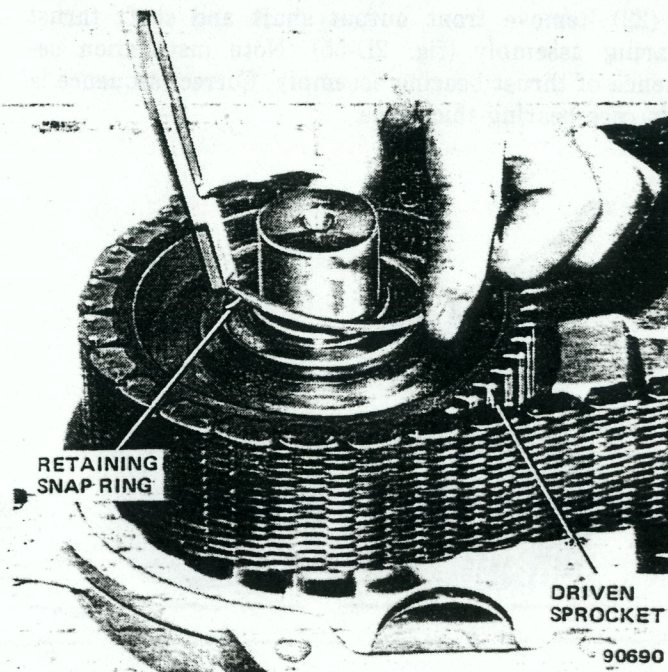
D-50 Driven Sprocket Retaining Snap Ring Removal/Installation
